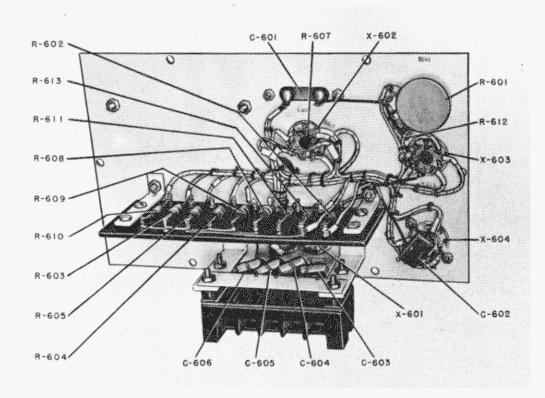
Voltage Regulator DL-7503556, G-1 for Type FM-3 Transmitter, Bottom View
